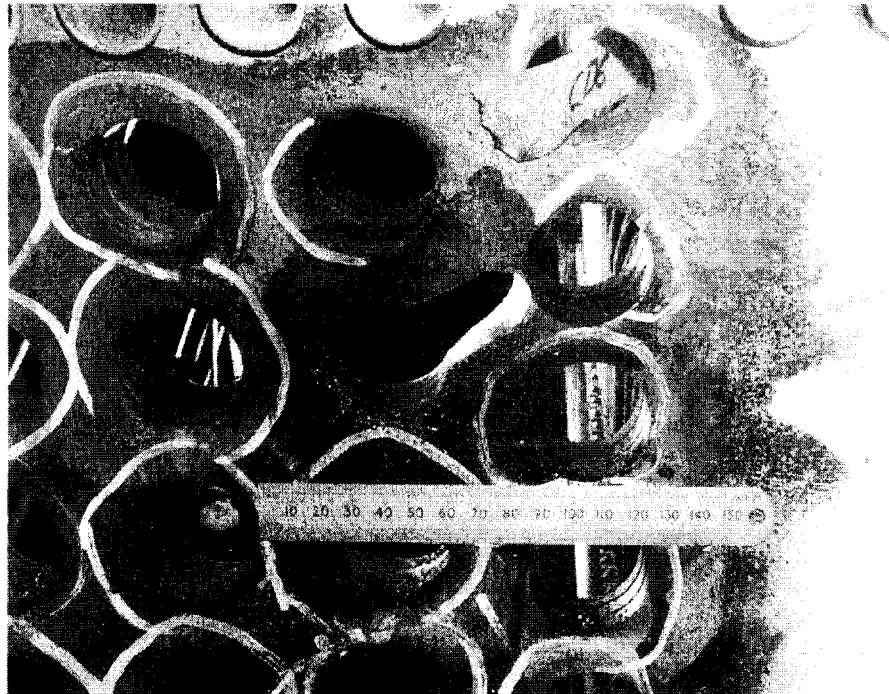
VIEW INSIDE AMS WATER DRUM SHOWING CLOSE UP OF G14 CRACK CUT OUT
